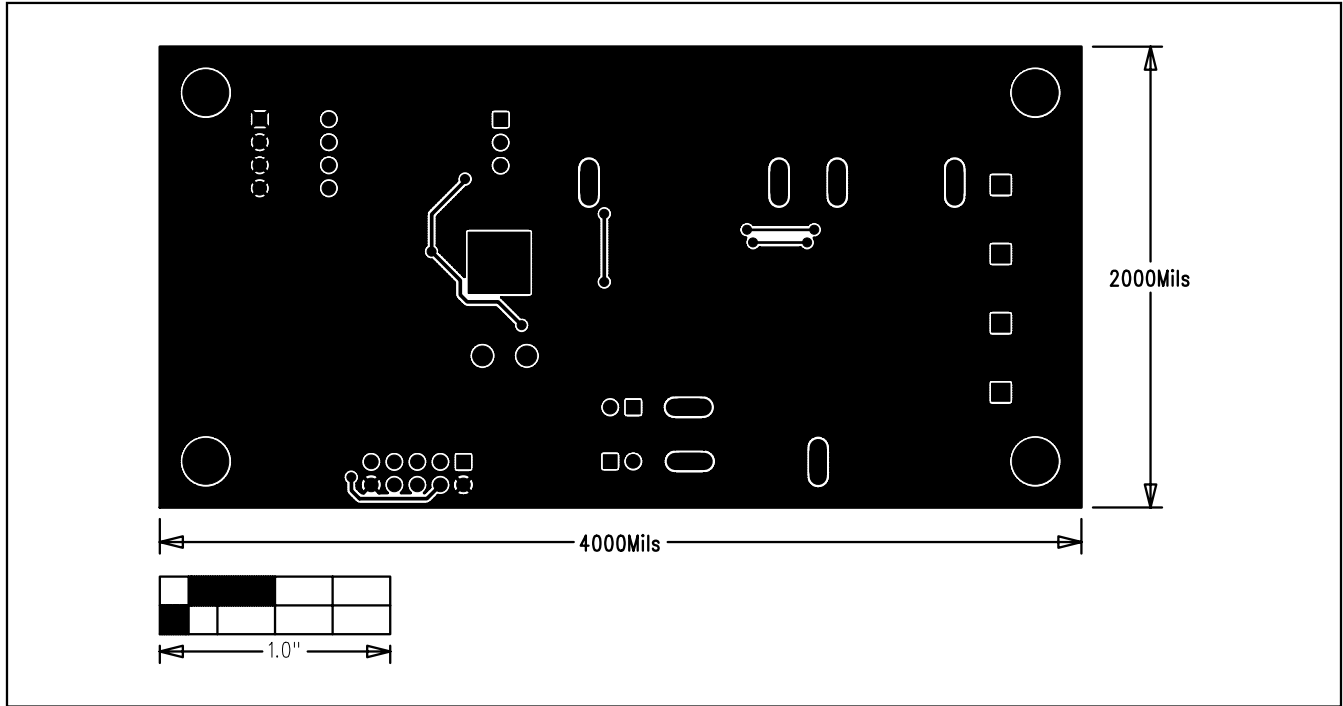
MAX8822 EV Kit PCB Layout—Solder Side
